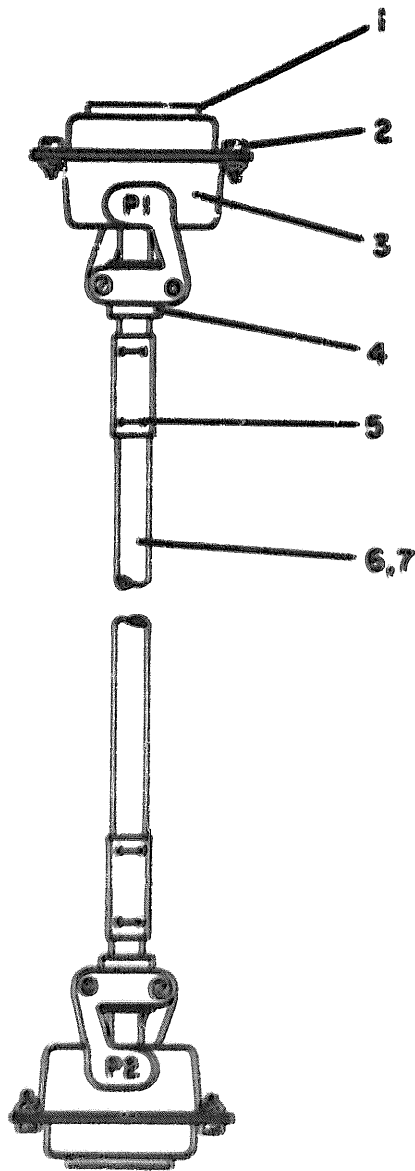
Cable Assembly, Communication Switch Card to Line Terminator
